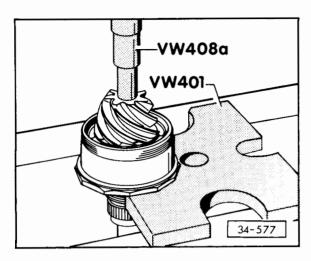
Heat inner races of double tapered roller bearing to about 100° C, install and press home
